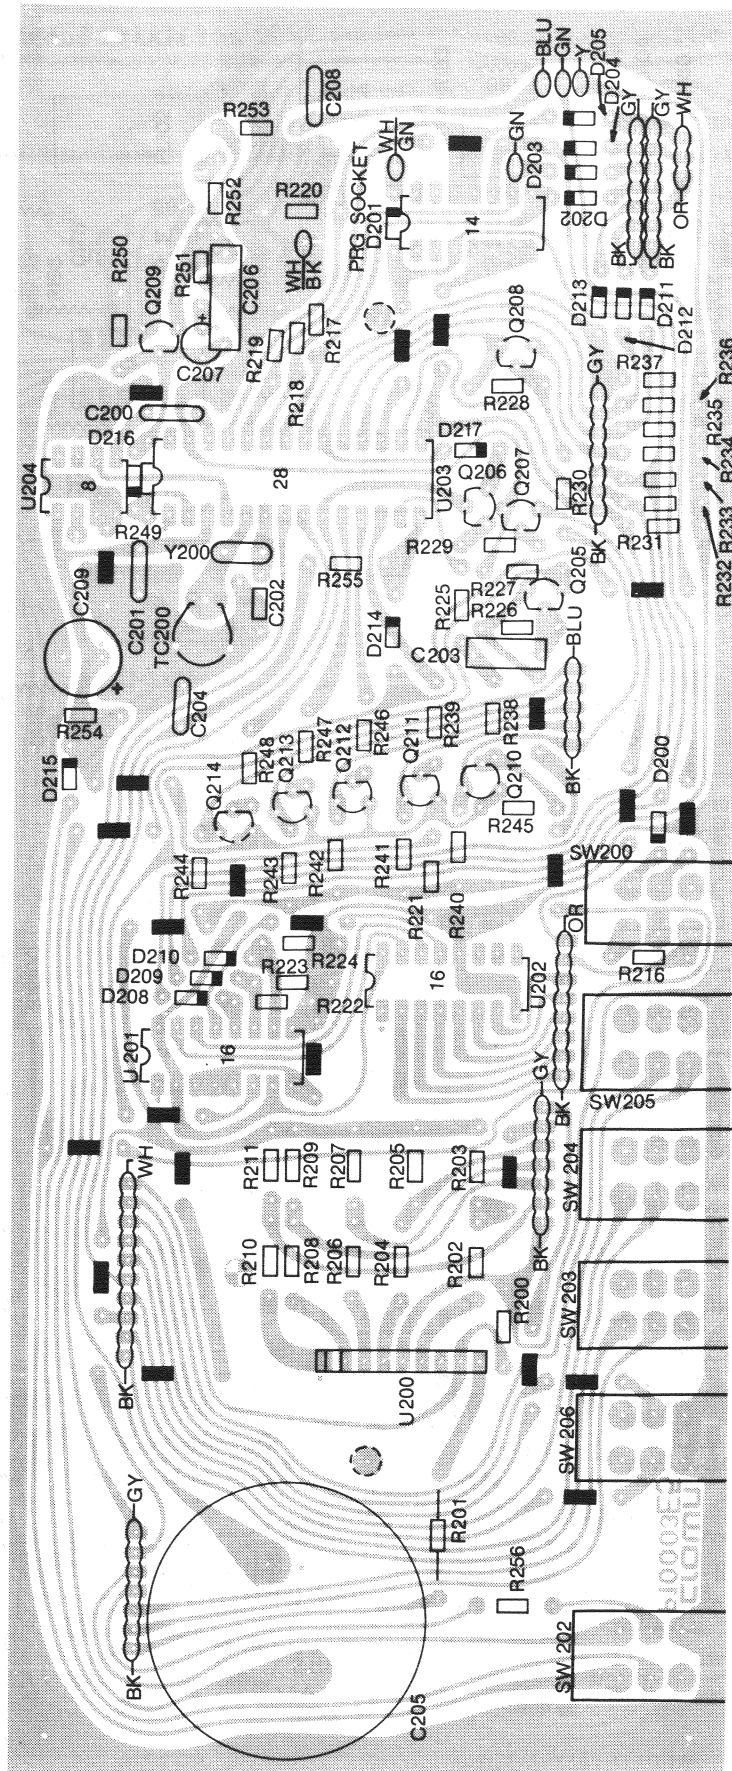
Control Module Component Board Layout; #Q42498-8
